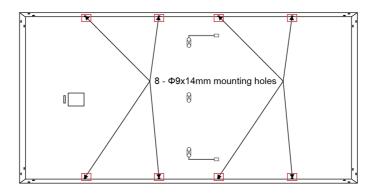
Eight mounting holes at the aluminum frames and GFRP composite frame
